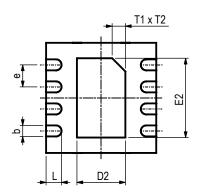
Dimensional drawing of SHT3x-ARP sensor package.
